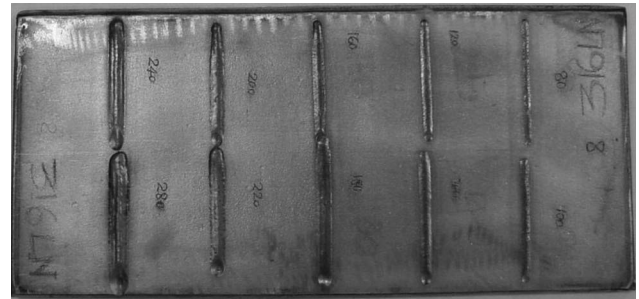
Bead-on-plate A-TIG welds on 12 mm thick 316LN stainless steel plate.
